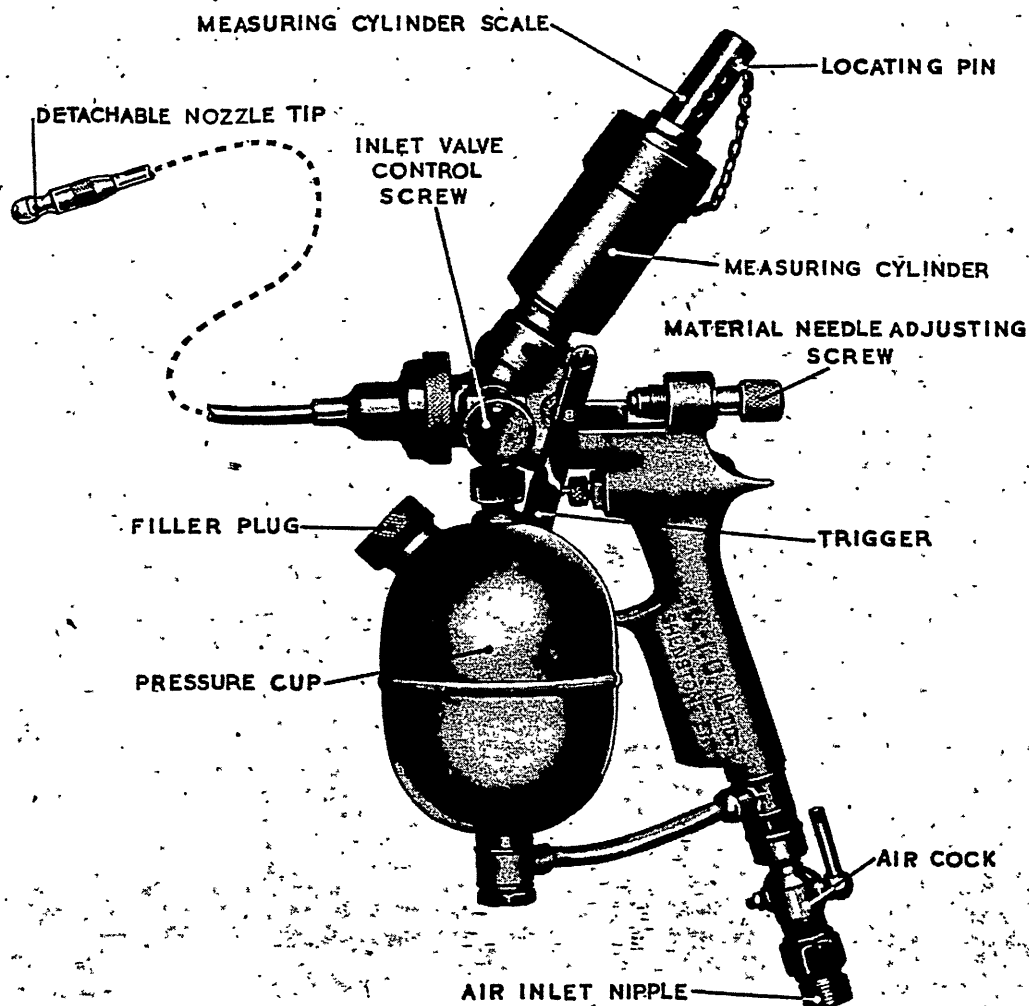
A.I.D. Type T.F.3-C.1 corrosion inhibitor spray gun
